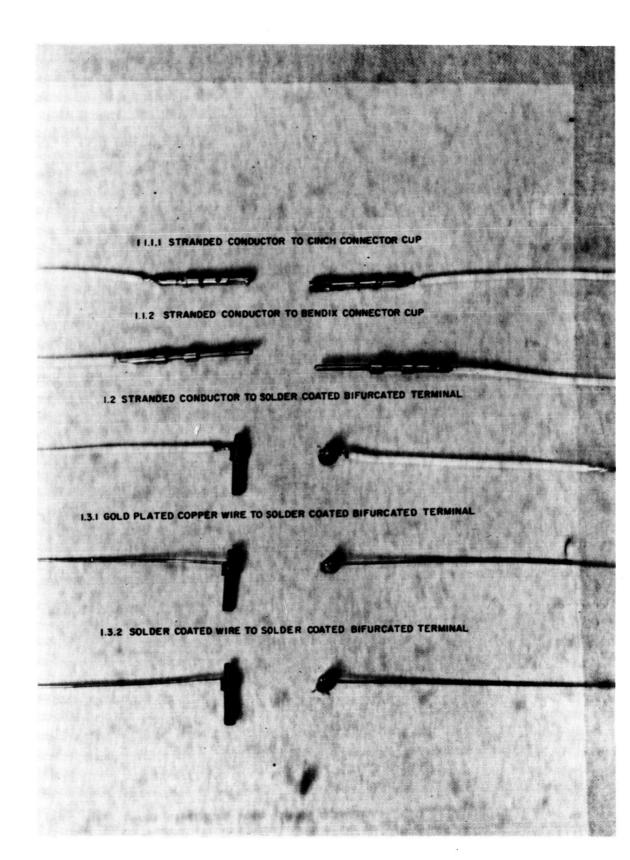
Photograph of five types of solder joints-1.1.1, 1.1.2, 1.2, 1.3.1, 1.3.2 (R105350).
